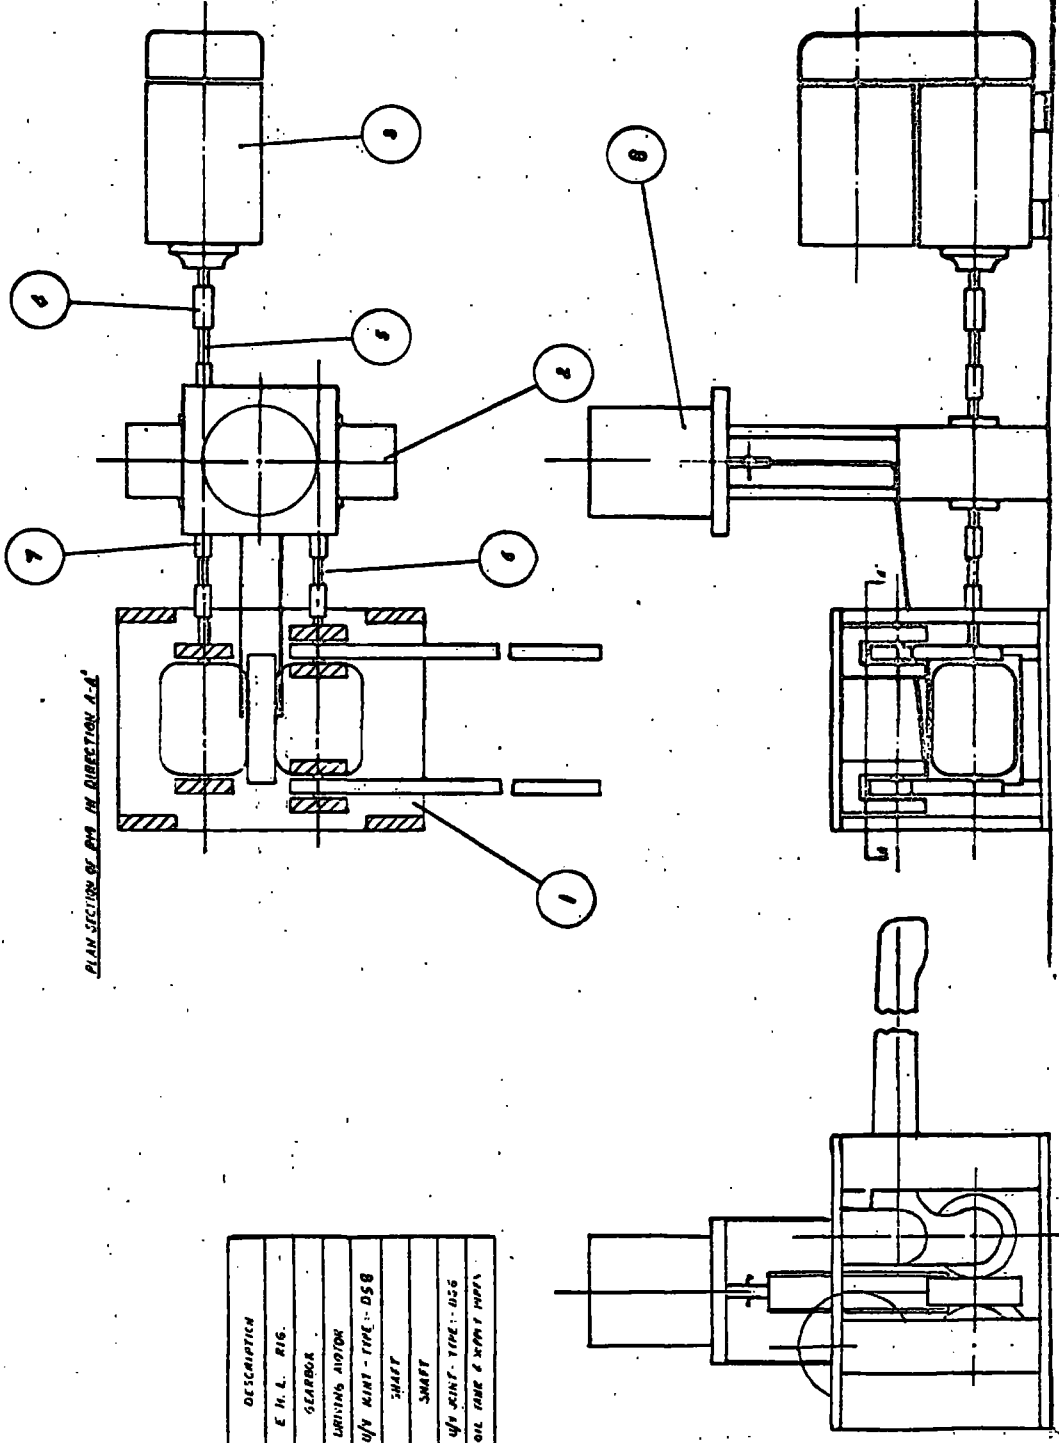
LAYOUT OF RIG, GEARBOX AND DRIVE.
